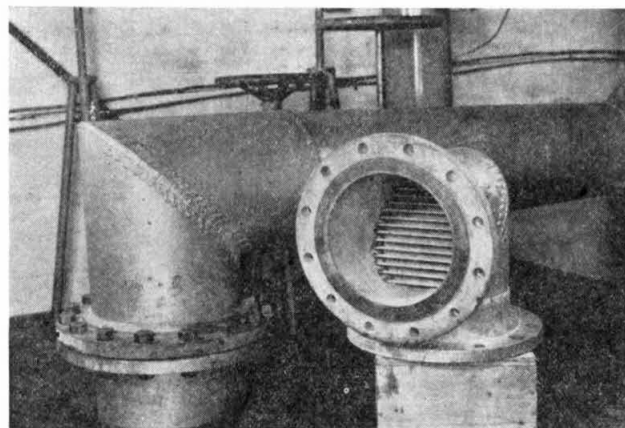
THE 12-IN. WELDED VANE ELBOW
